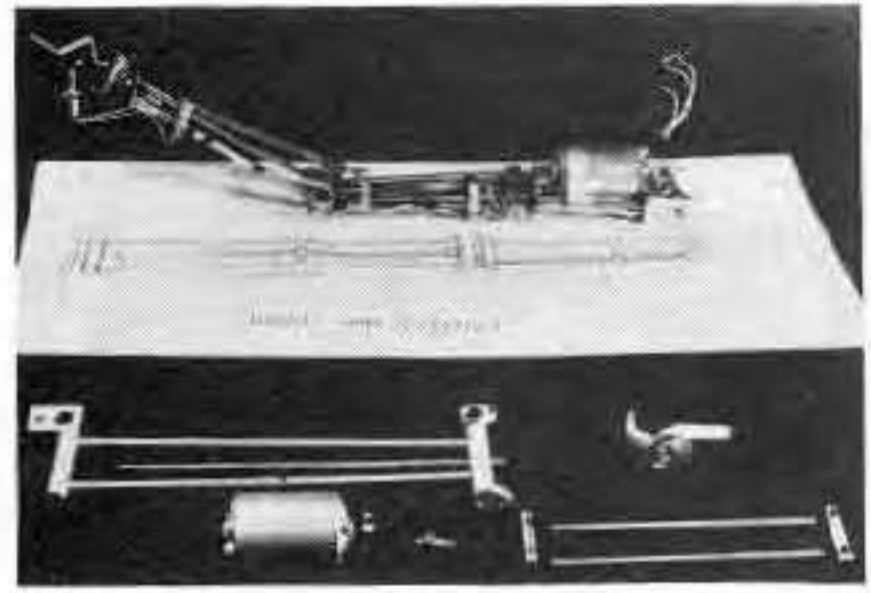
MANIPULATOR ASSEMBLY. Finished unit and separate pieces are facing opposite ways.
